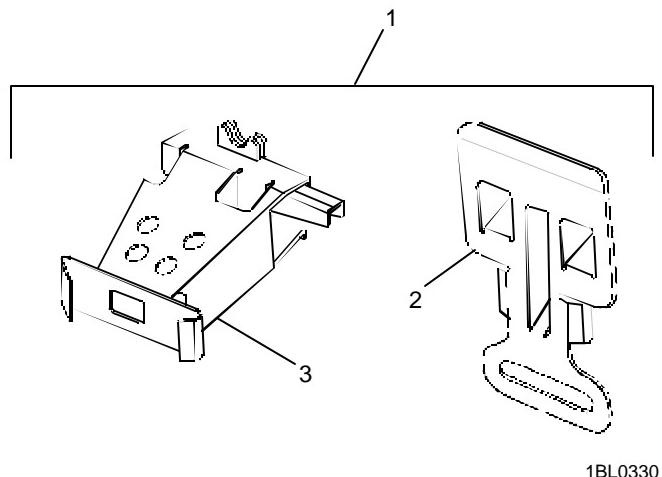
Component of End Item, Adapter Assembly, Ammo, PN 12976909
